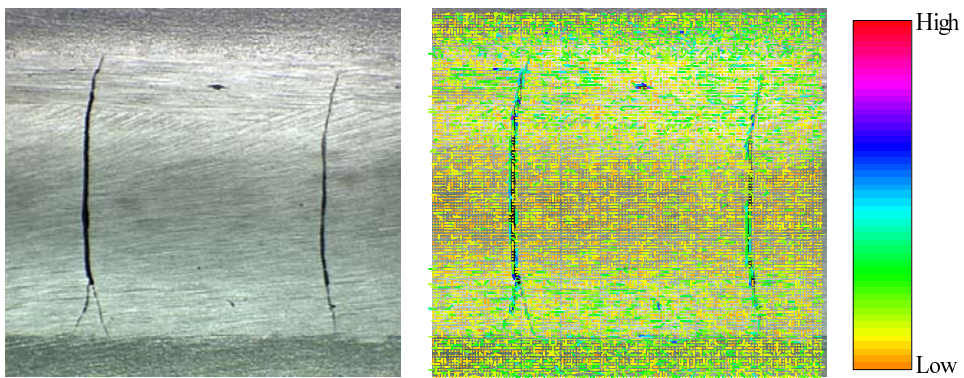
Circular type defects on weld parts and rotational image vectors (480 × 512 pixels).
